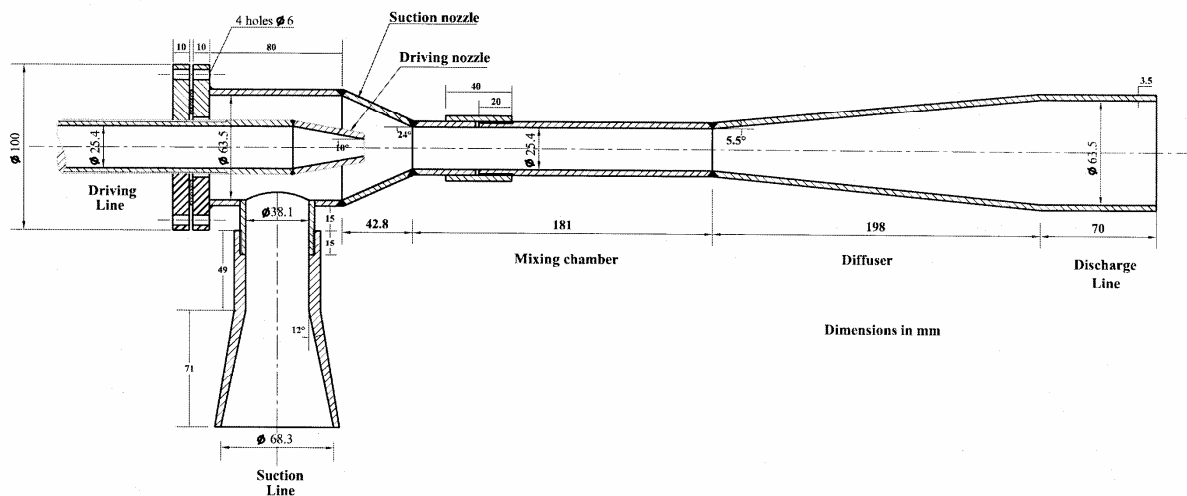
a) Assembly of slurry jet pump with conical suction inlet
